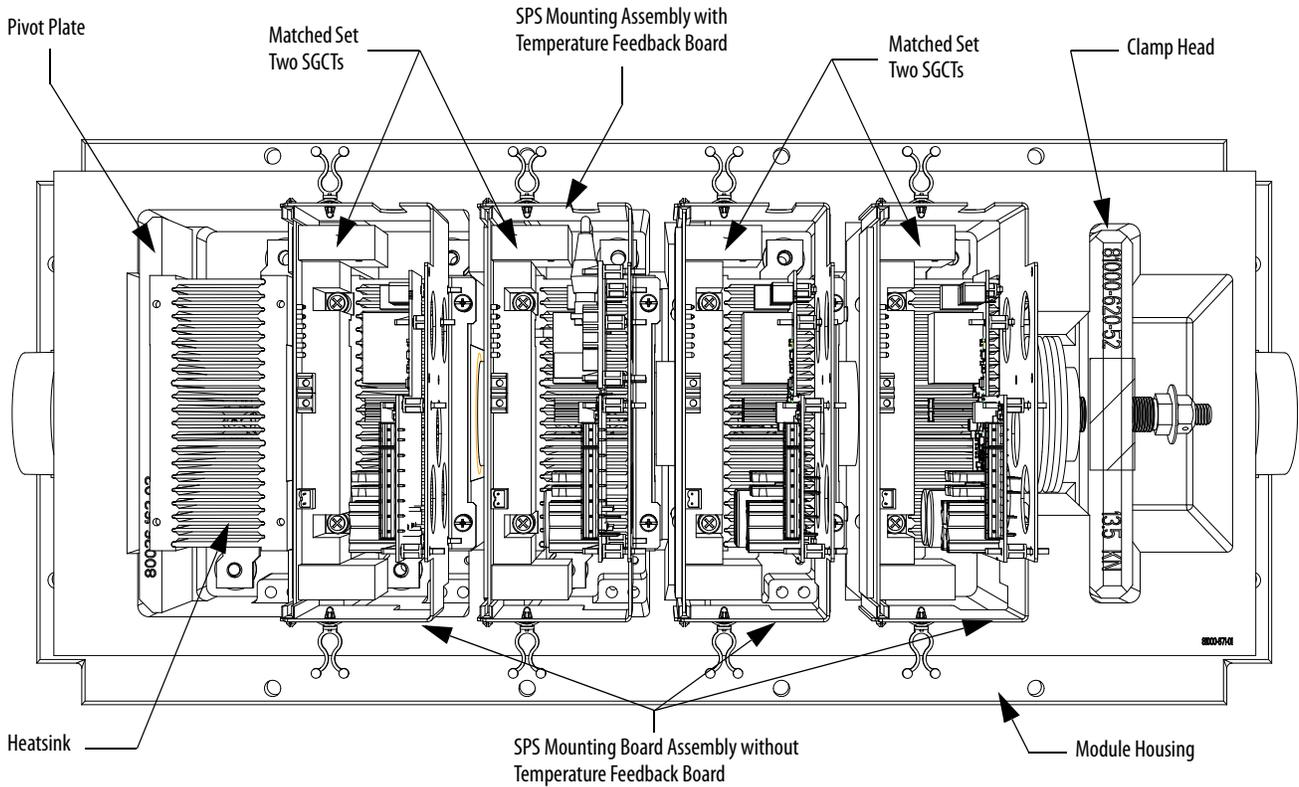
6600V Six Device PowerCage Module (heatsink model)
